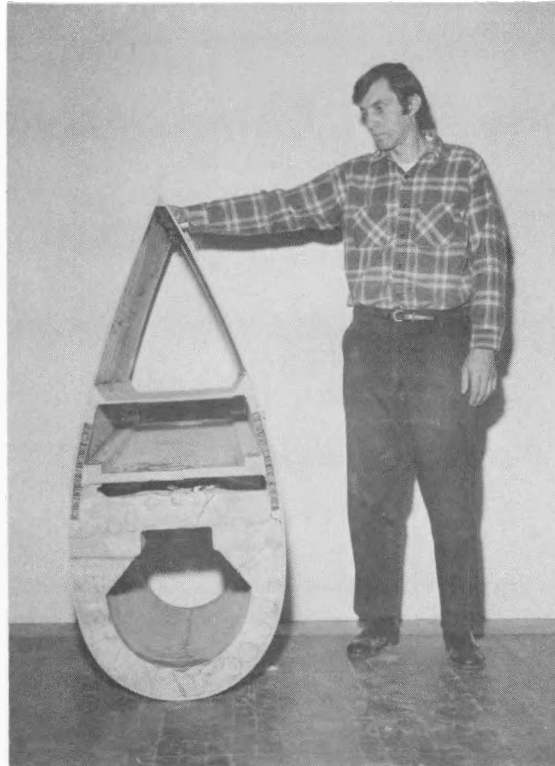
Inboard section cut from 20 foot wood blade test specimen.
